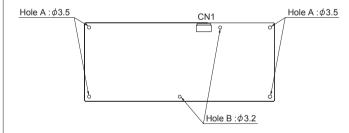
CR-HUT □-2 Resin spacer mounting method
